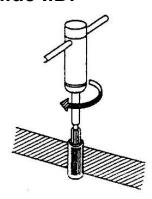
Valve Guide Reamer (typical) 6.6 mm (0.2598 in.) shown
